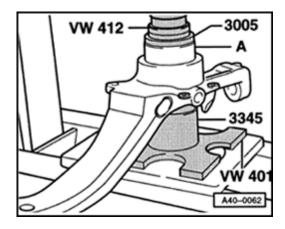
Pressing wheel bearing into 75 mm diameter wheel bearing housing
